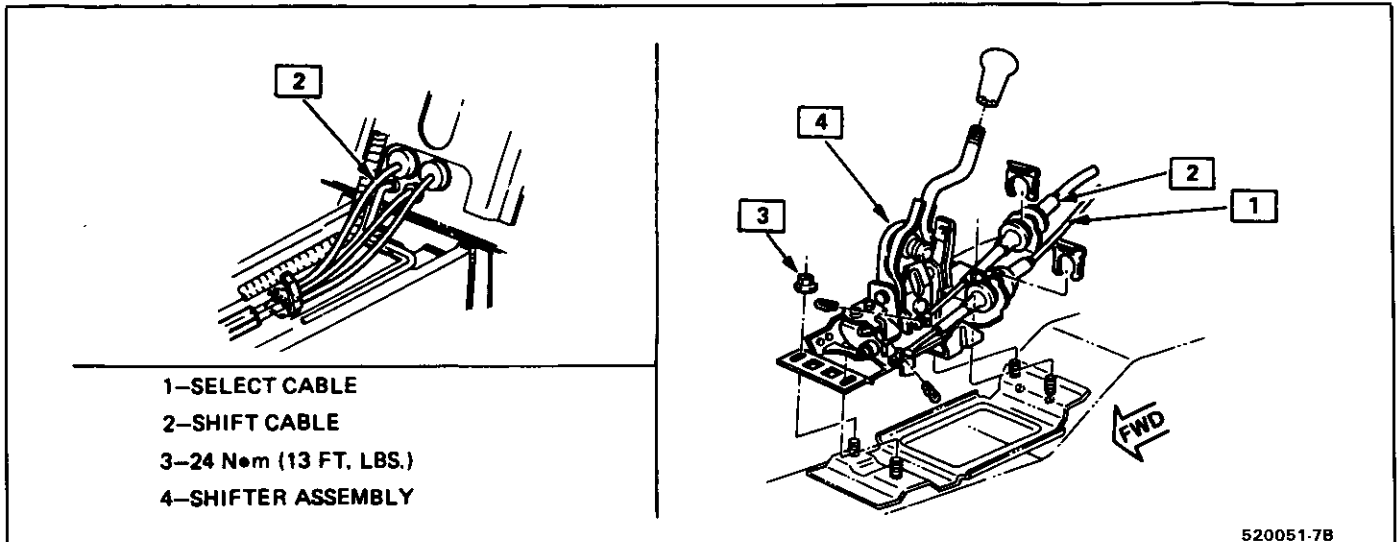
Shift Cable & Select Cable Routing and Cable Attachment at Shifter
